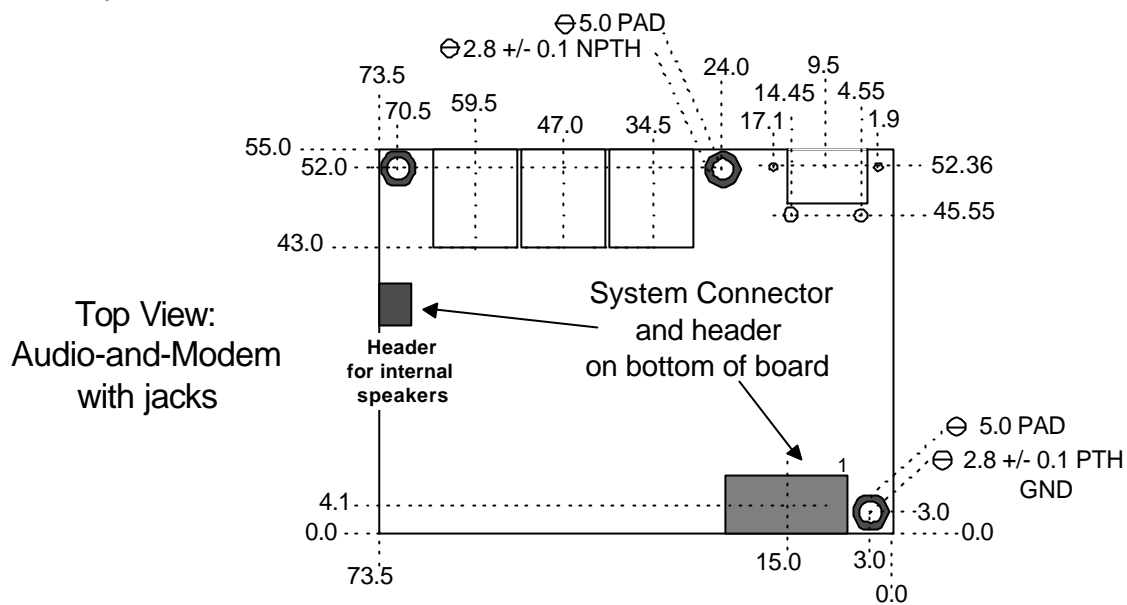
Mechanical dimensions for Audio-and-Modem MDC with jacks
